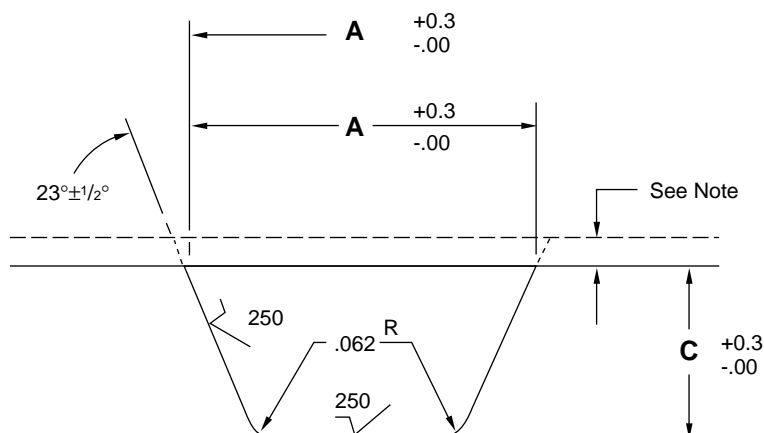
Rough Machining Detail for Corrosion Resistant Overlay of Special Type “SR” Ring Grooves
